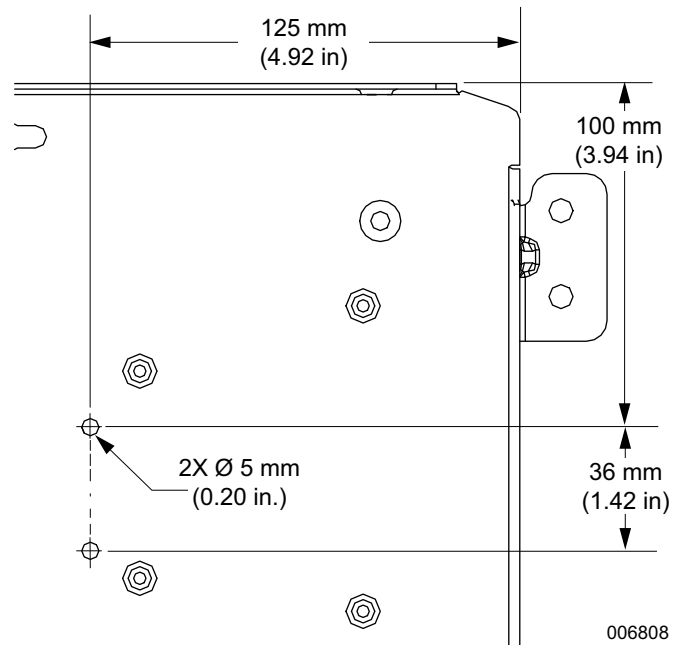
Hole Locations—10, 13, & 20 kVA Engine Divider Panel
